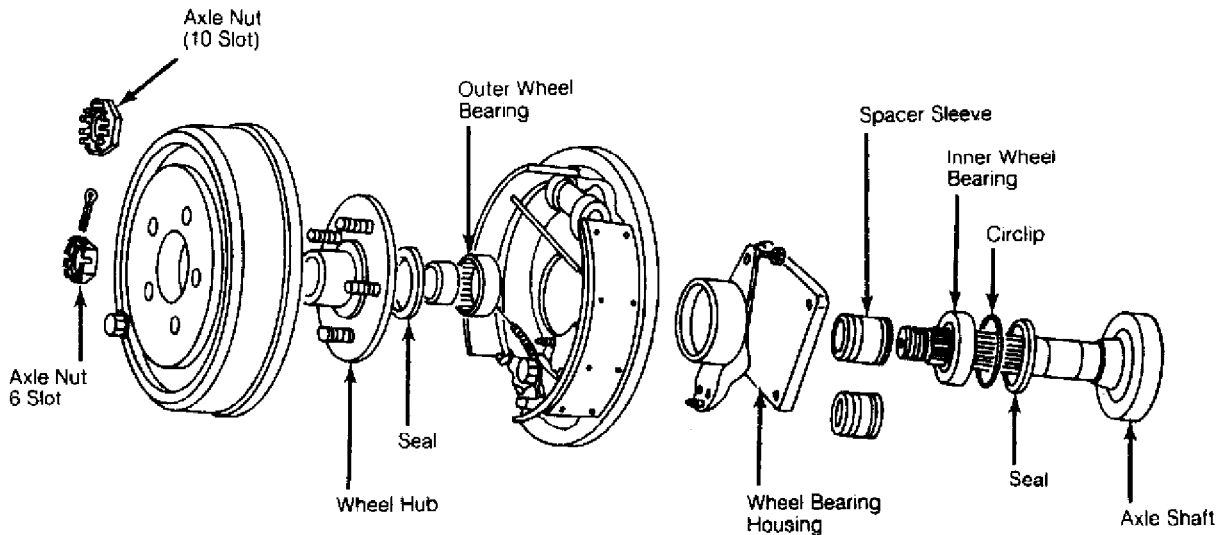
Identifying Axle Shaft, Wheel Bearing & Hub Components
